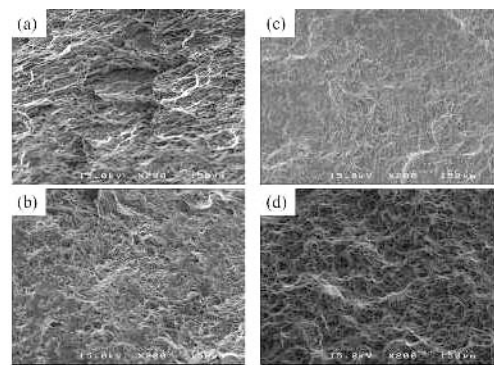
The fracture surface of EX-2 with different tilting angle :(a) 0°, (b) 30°, (c) 45°, (d) 60°.
